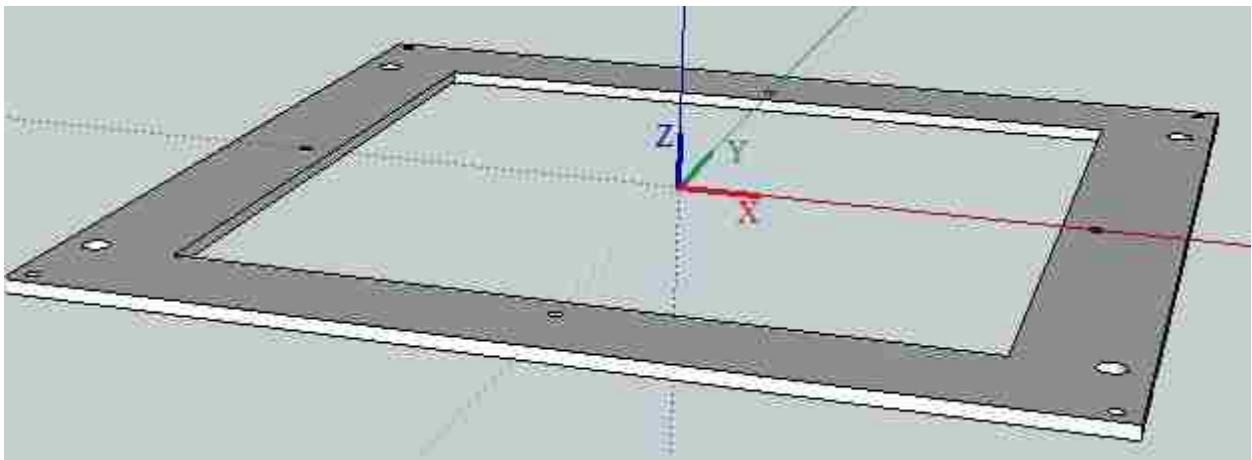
Orthogonal view of the 20x20 cm² middle trimmer aluminum plate.
